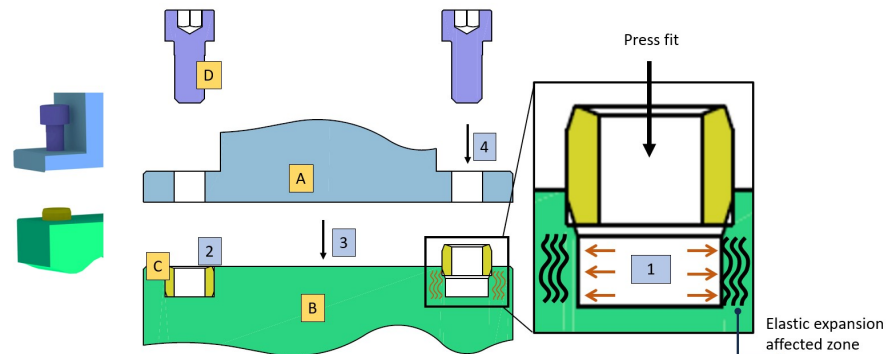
A & B are the parts to be assembled; C: intermediate, D: screw; 1- Expanding the composite material; 2- Inserting of the intermediate part, 3- Assembling the two parts; 4- Assembling the screw.
